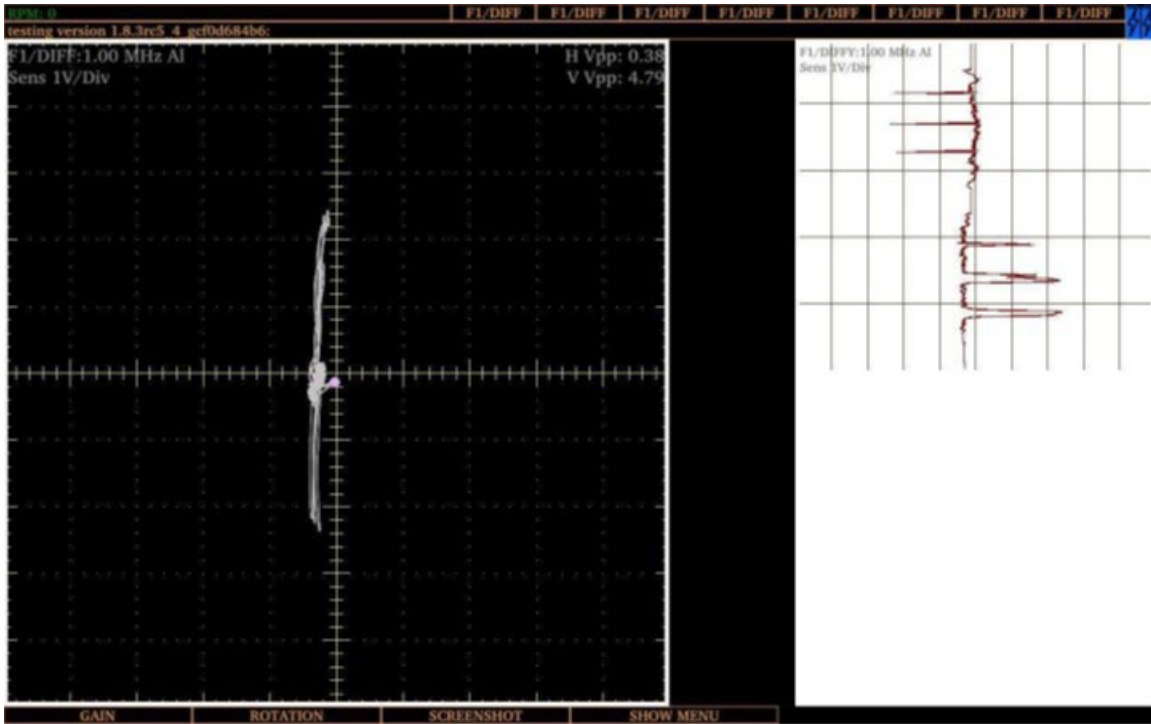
ET indication of all the notches in butt weld test panel TTCI-2
